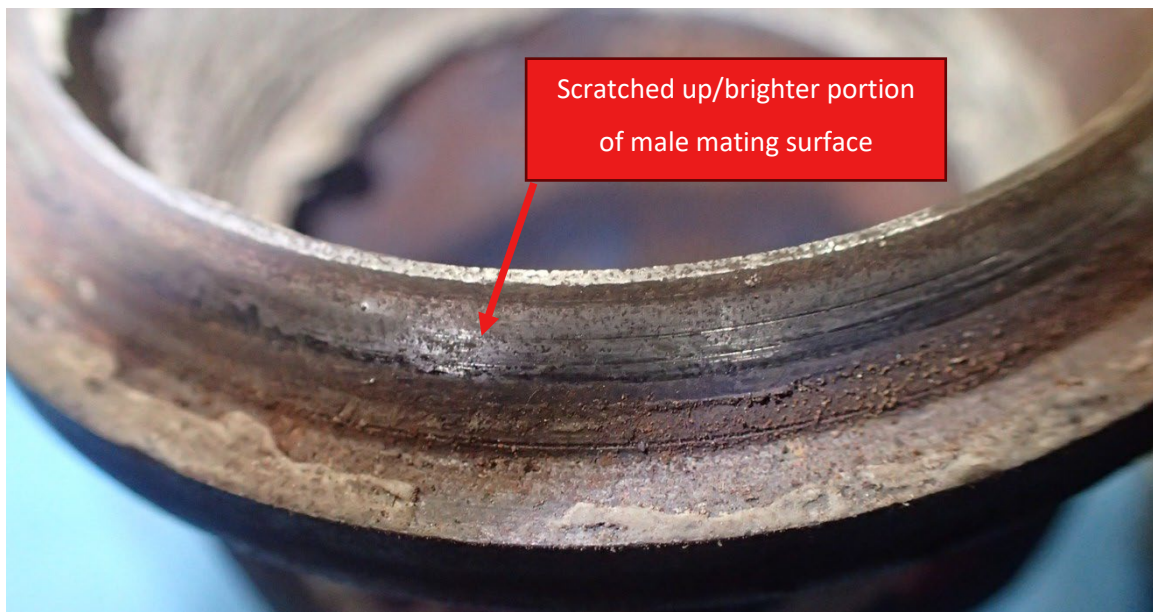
Male mating surface after reassembly to wrench tight and disassembly.
